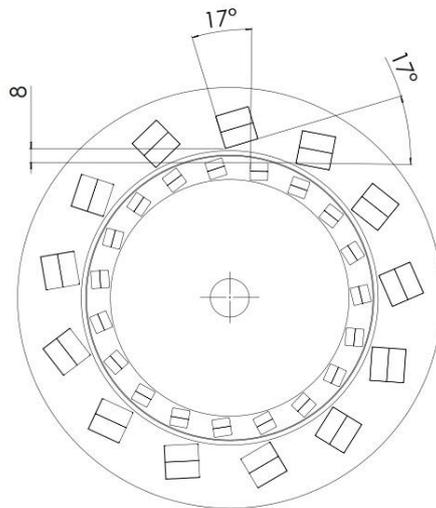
Second arrangement of stator – rotor configuration in a 3D CAD format
